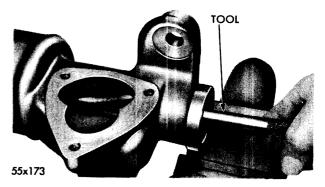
Removing Lower Piston Rod Seal (Tool. C-3331)
